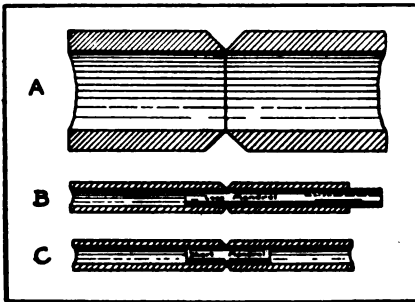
AT A, ENLARGED VIEW OF TUBING IN SECTION READY TO BE WELDED. B.—WITH LONG MANDREL IN PLACE. C.—USING SHORT BAR OR MANDREL
